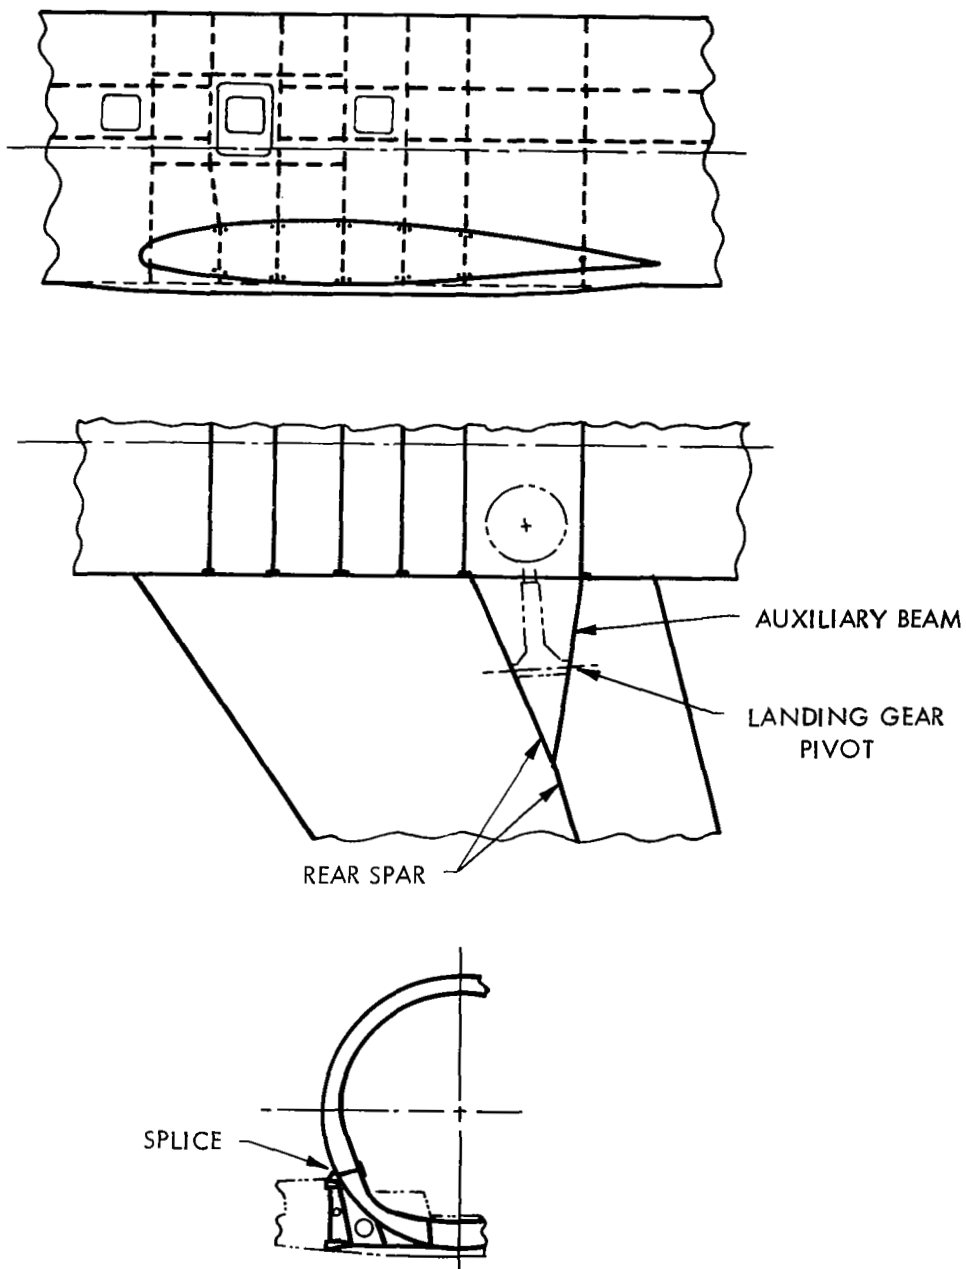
JETSTAR EXISTING CENTER SECTION STRUCTURE
